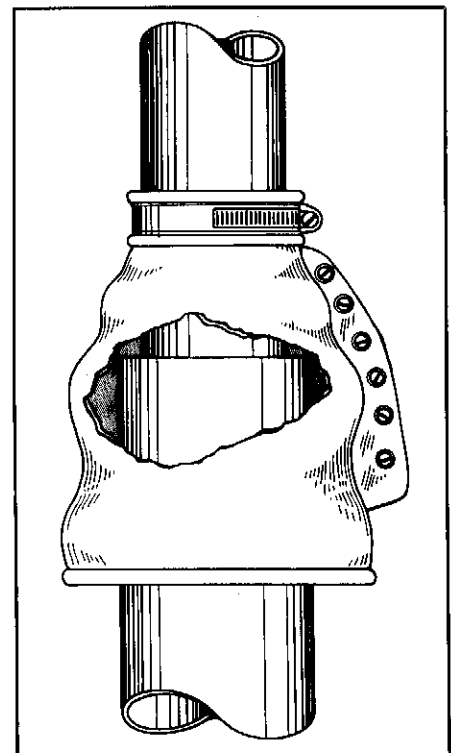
KB6FNP suggests a Volkswagen transaxle boot to cover and protect a rotator thrust bearing.
